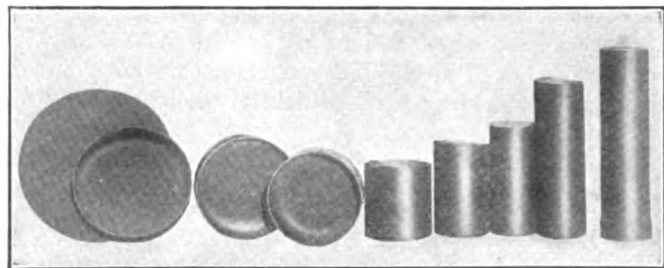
CUPPING OPERATIONS ON HYDRAULIC DRAWING PRESS
